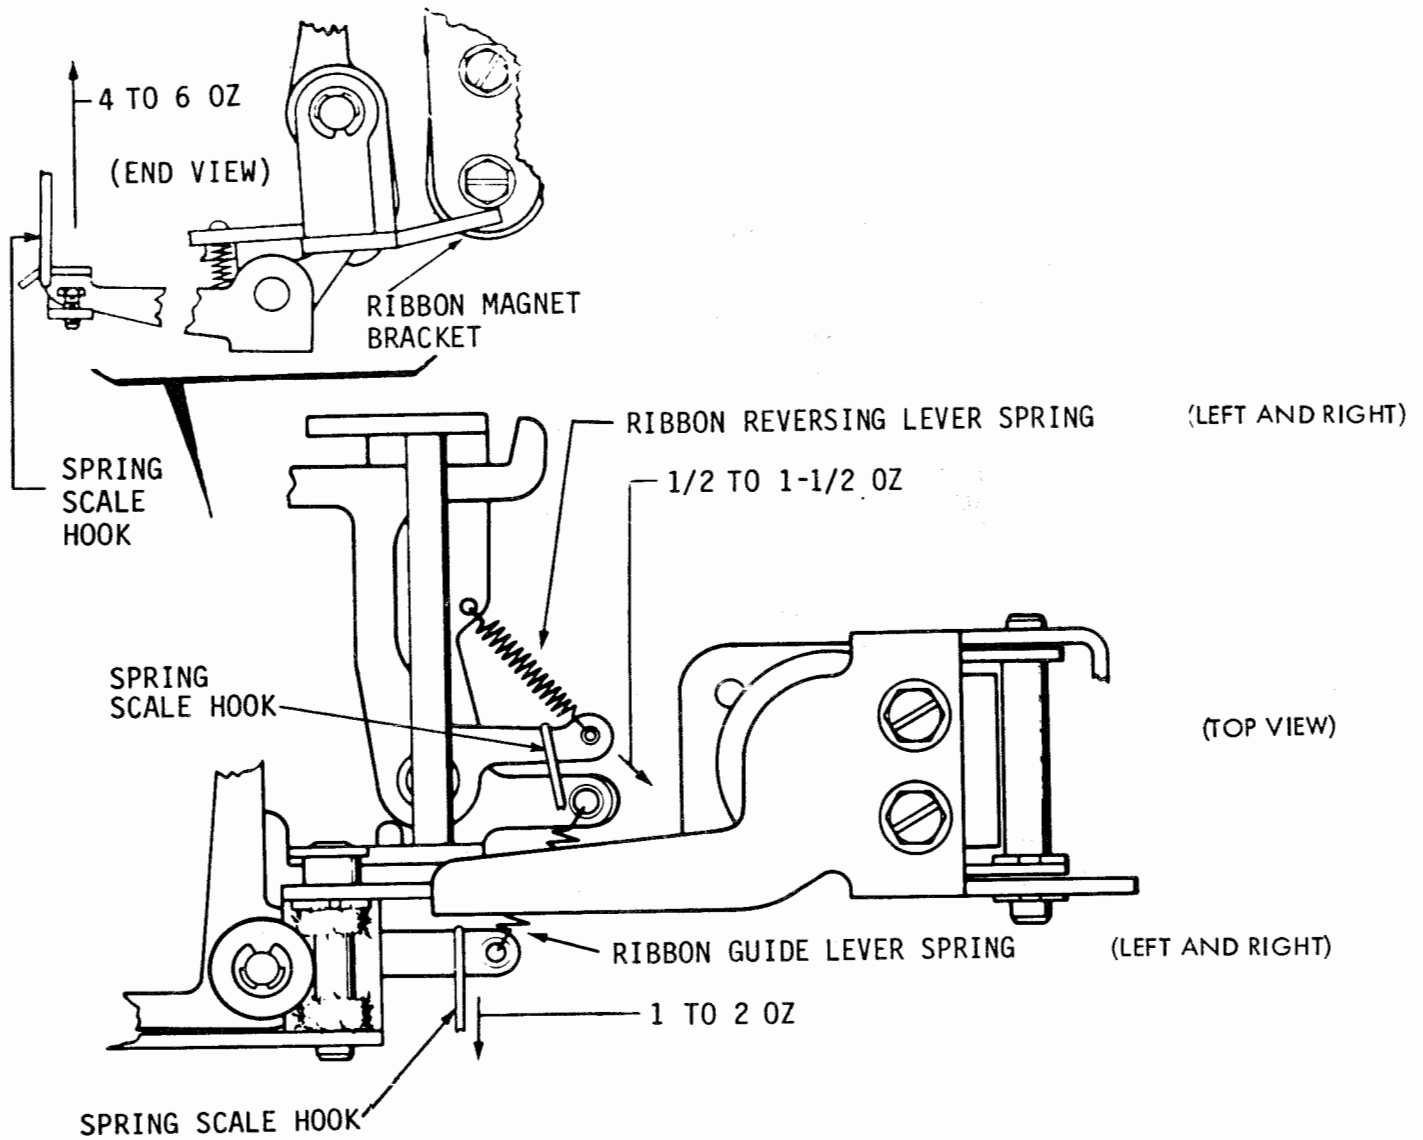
Ribbon Guided Lever Spring, Left and Right; Ribbon Reversing Lever Spring, Left and Right; and Ribbon Roller Bail Spring, Left and Right
